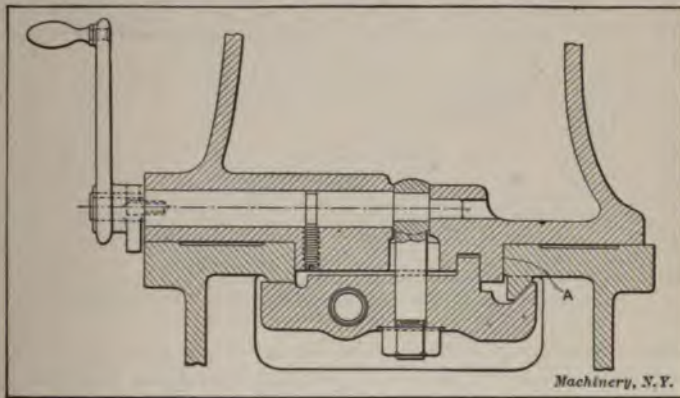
Eccentric Action Clamping Device used on Chucking Lathe
